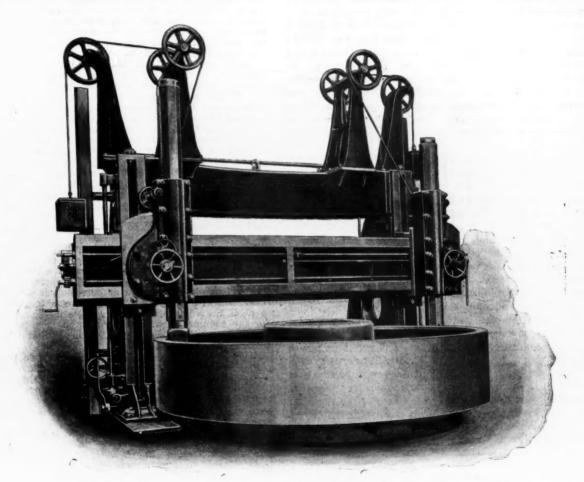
Bement, Miles & Co.'s Boring and Turning Mill Driven by Motor Under the Floor.
